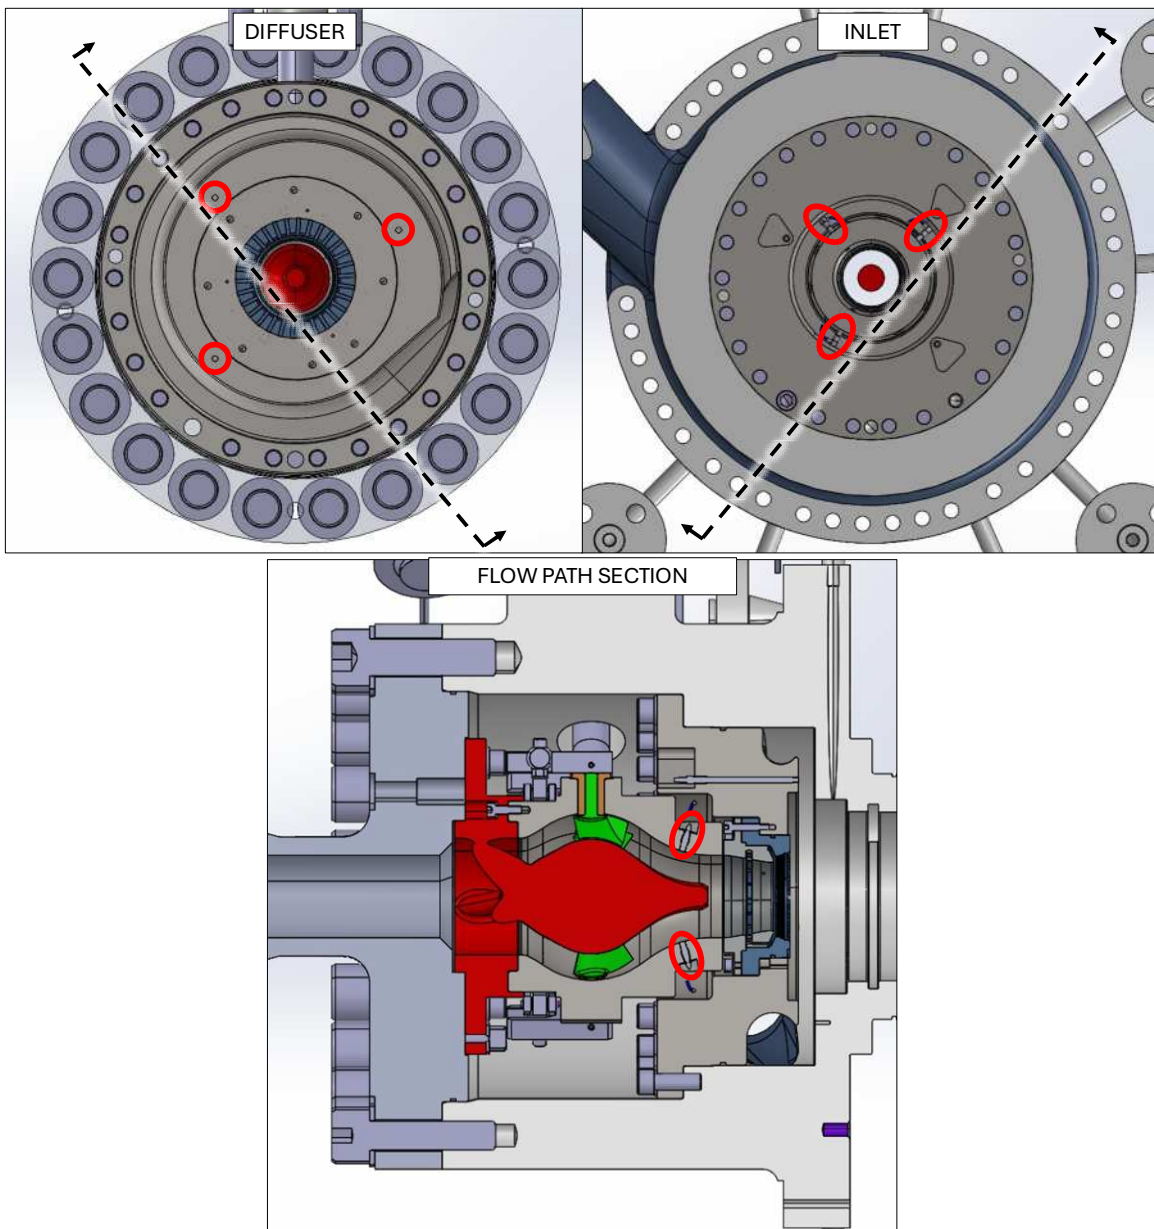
Stage one IGV and compressor housing solid model sections. UPPs are circled in red. Impeller is not shown.
